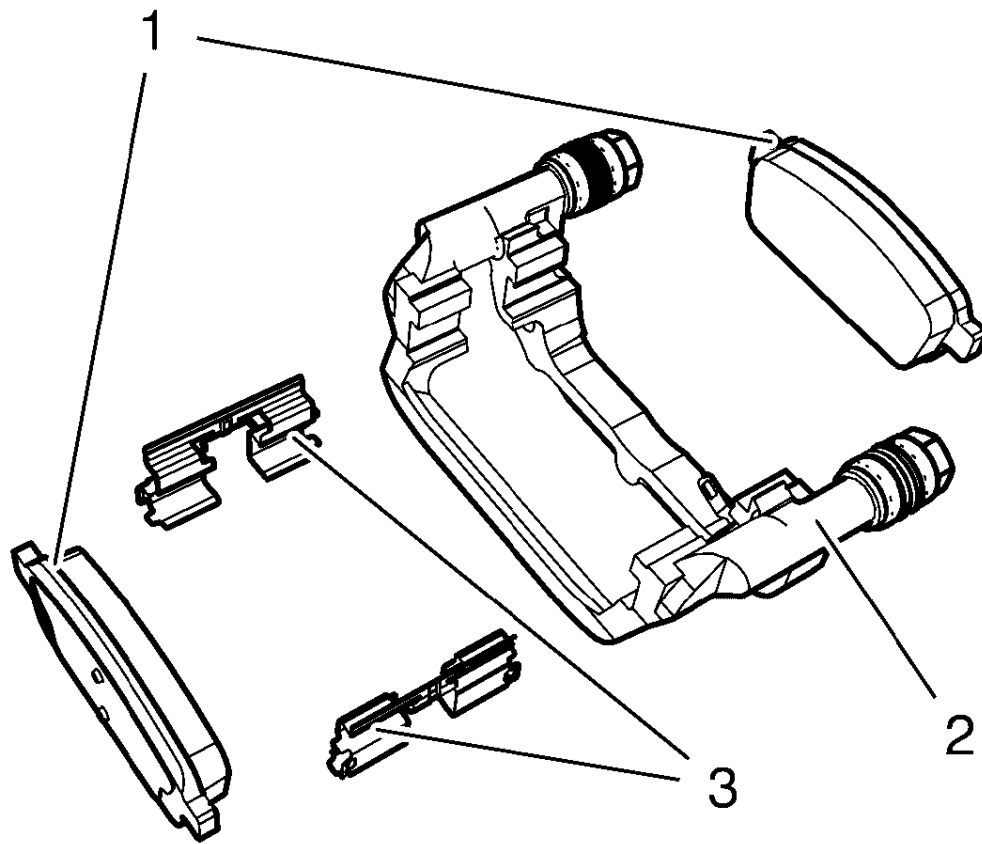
Exploded View Of Brake Pads And Brake Caliper Mounting Bracket
